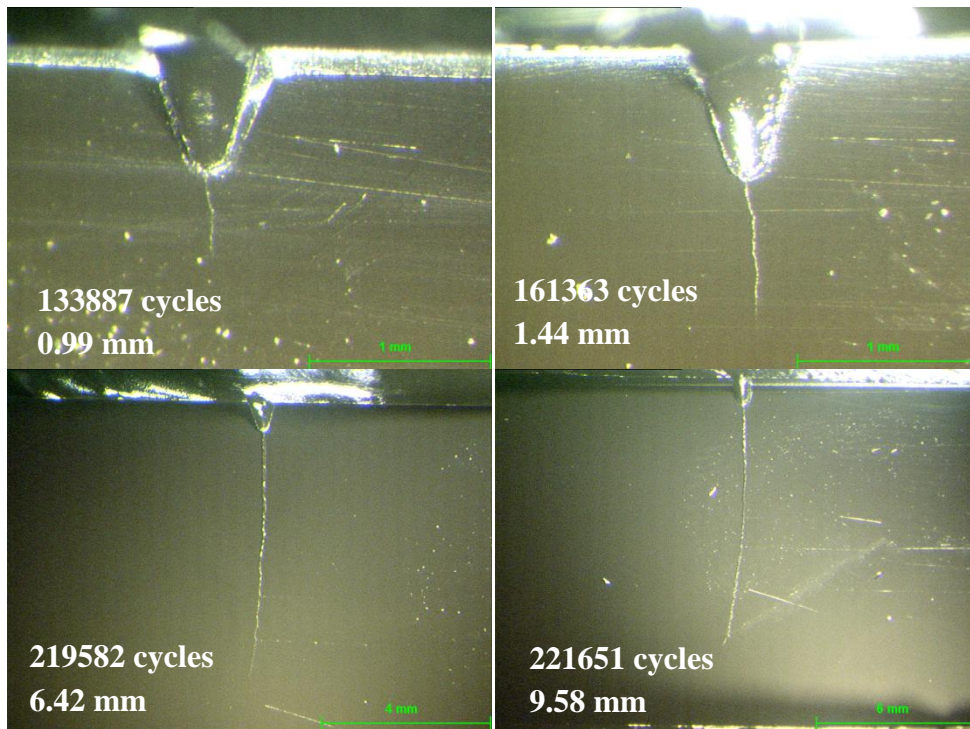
Replicas of fatigue crack initiated at a notch (Specimen 7)
